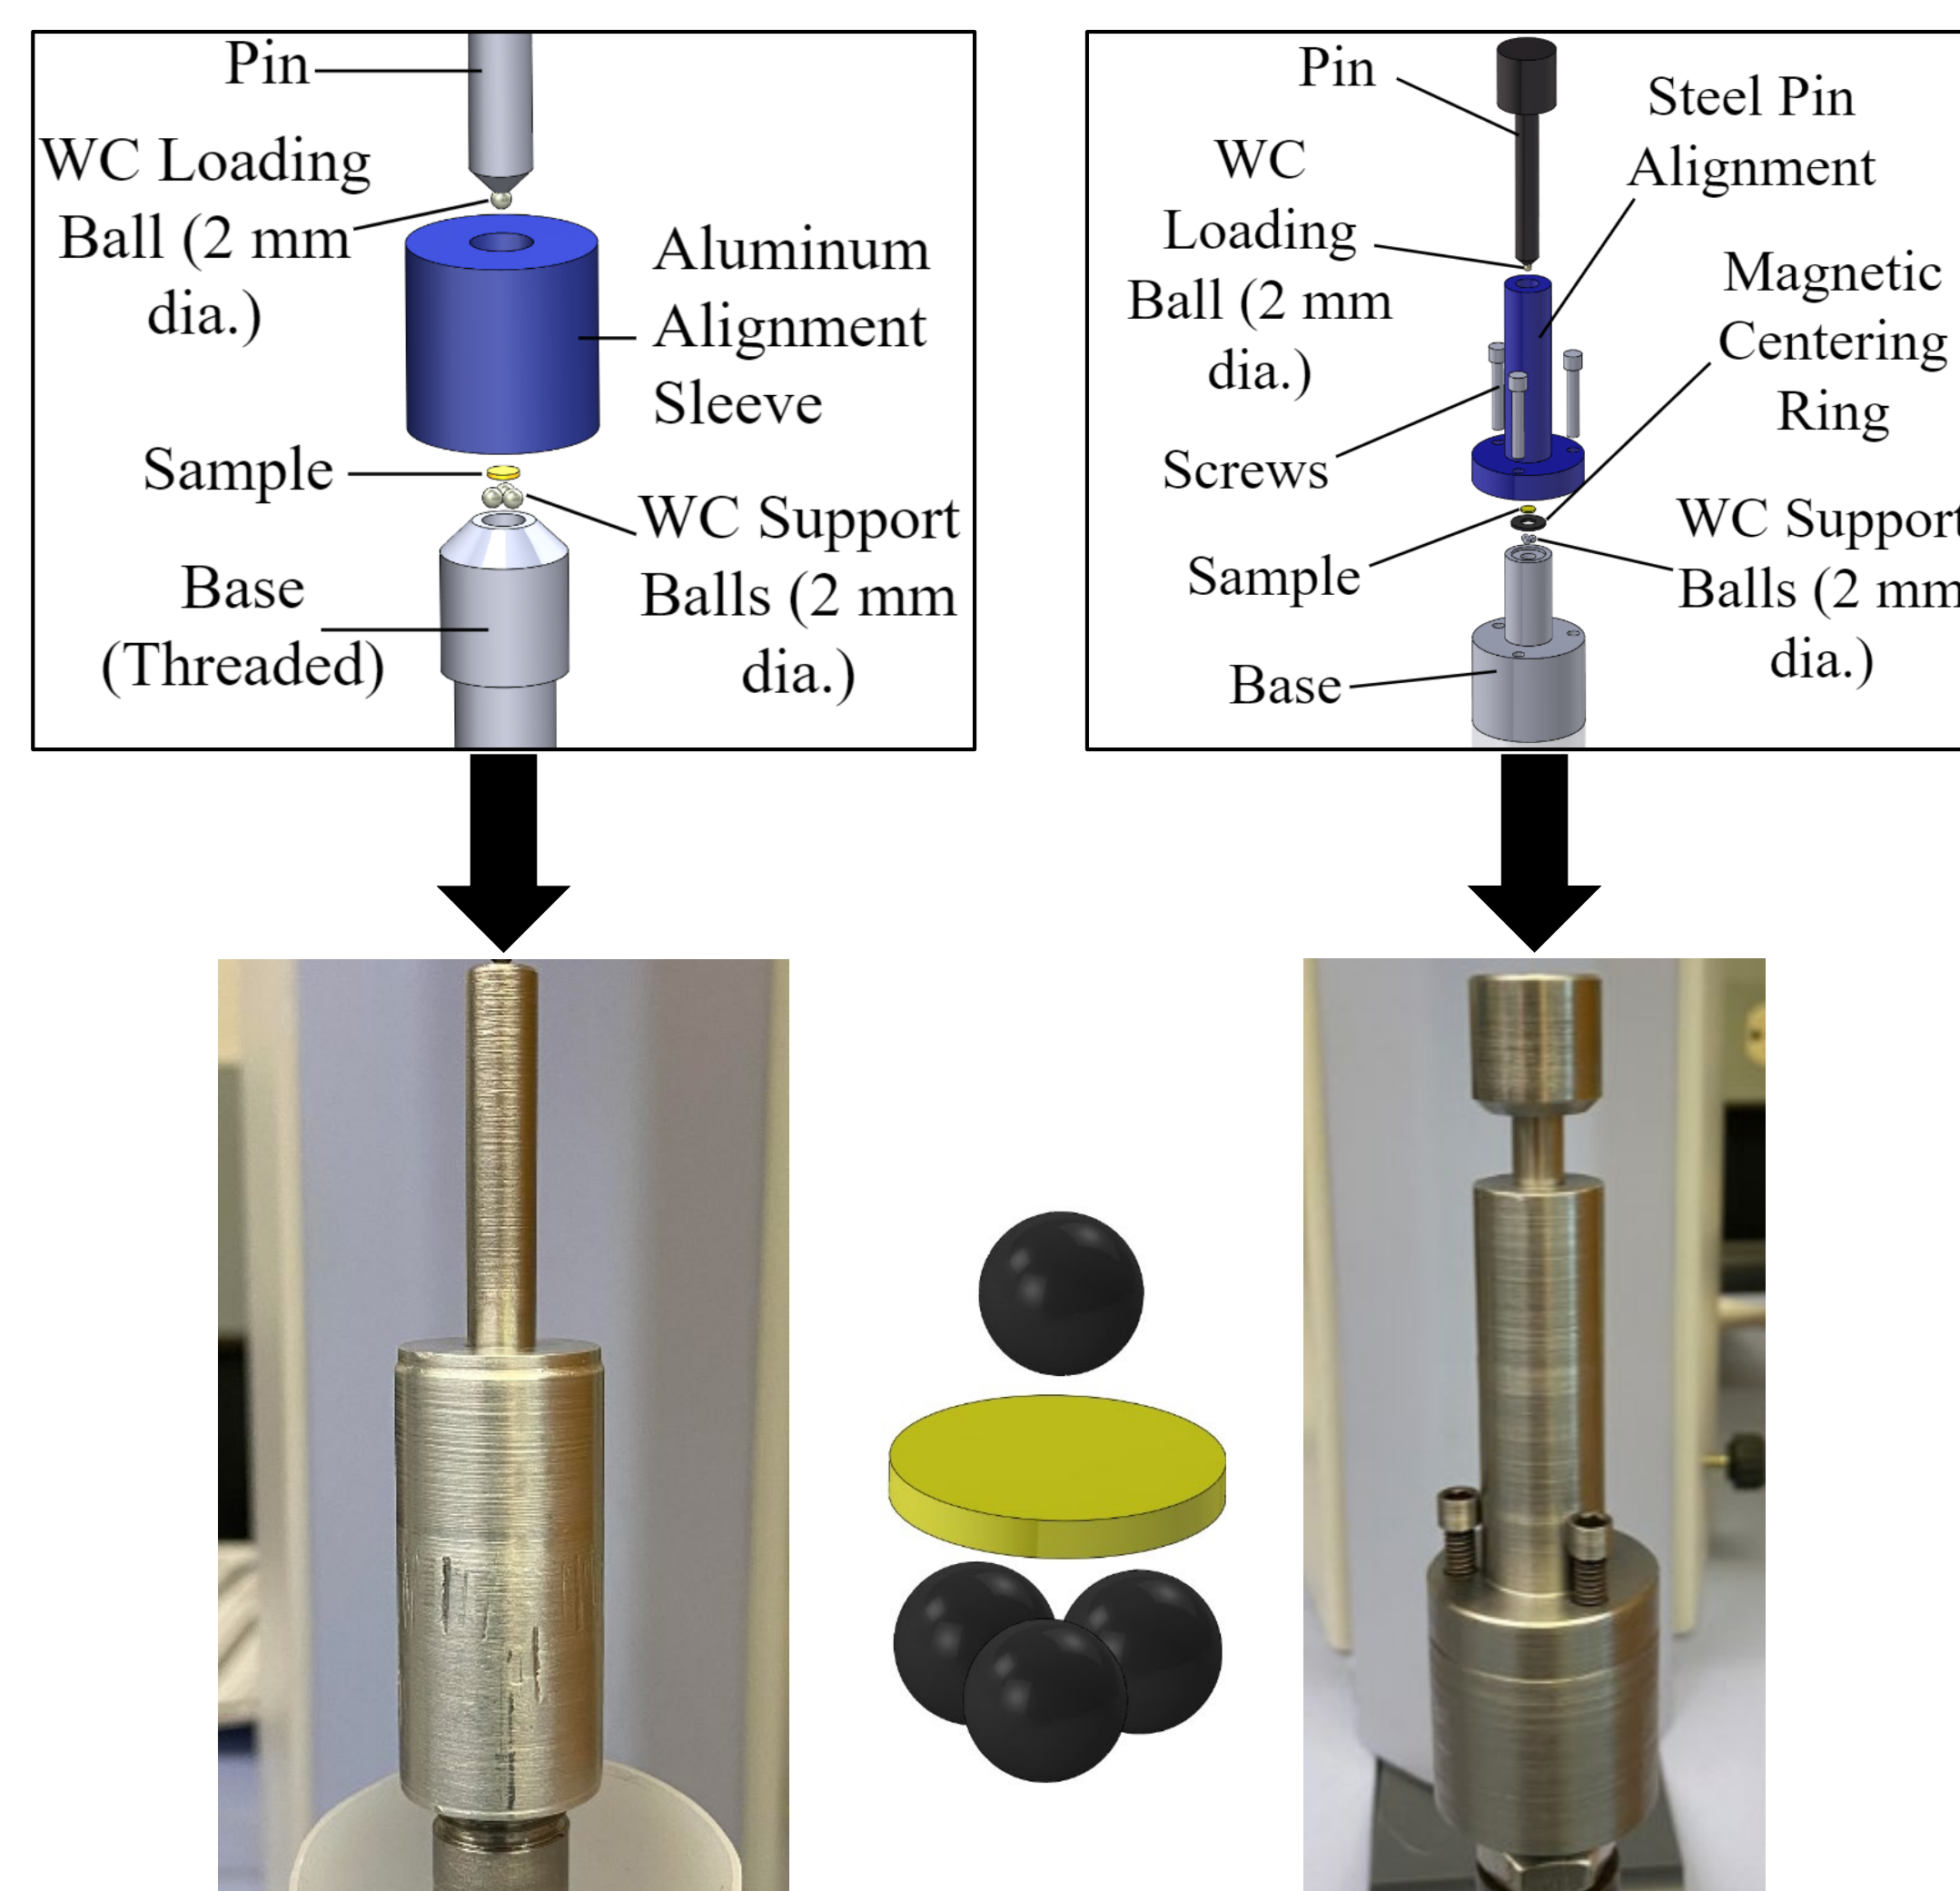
CAD drawings and images of Fixture A and Fixture B along with a ball-on-three-ball schematic
